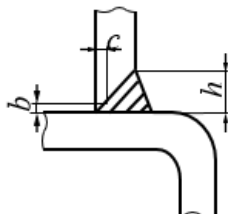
Weld preparation and fit-up – Fillet welds in circular hollow
